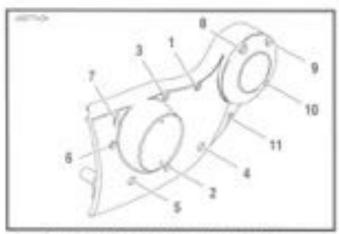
Georgase Cever Mounting Screw Torque Sequence
